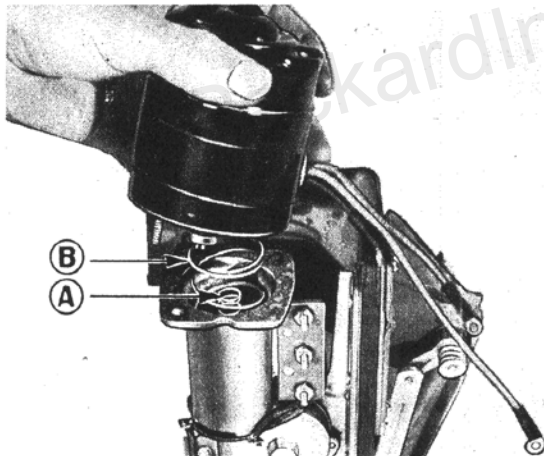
Placing Motor on Housing (Note Position of Motor Wires)
